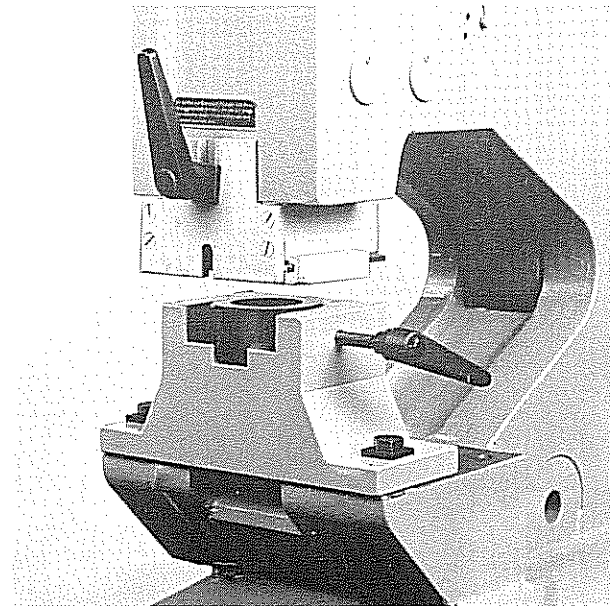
Special punch equipment for accommodating punches and dies with a cutting diameter of up to 50 mm
